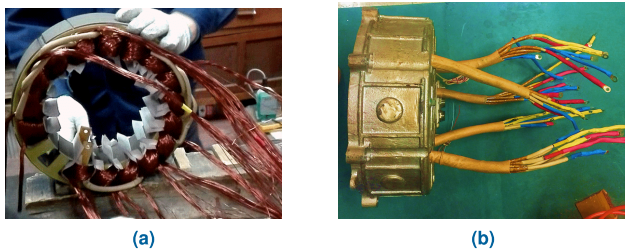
Machine prototype(a) Manufacturing process (b)complete machine prototype.
